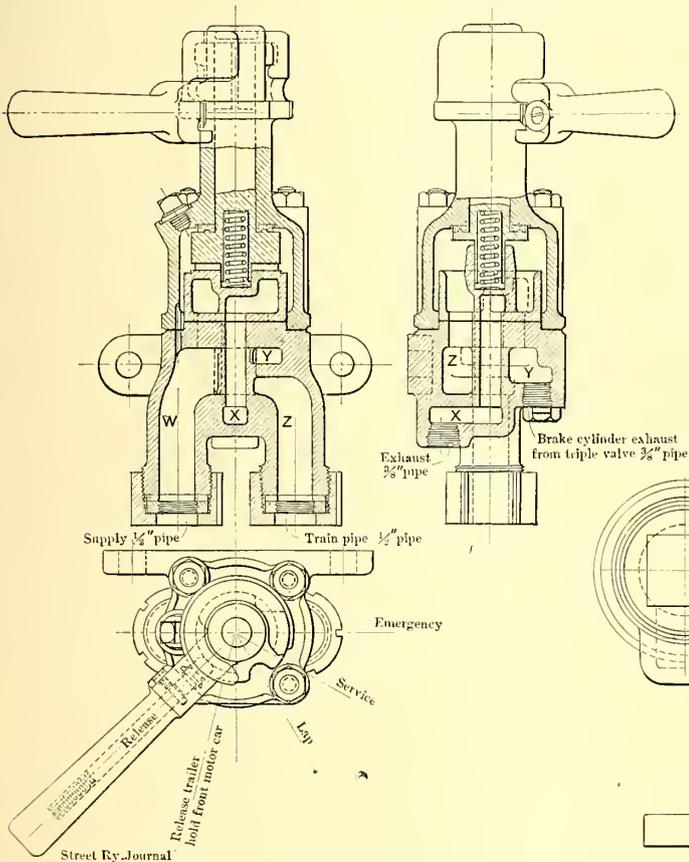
DETAILS OF CONTROLLING OR BRAKE VALVE
